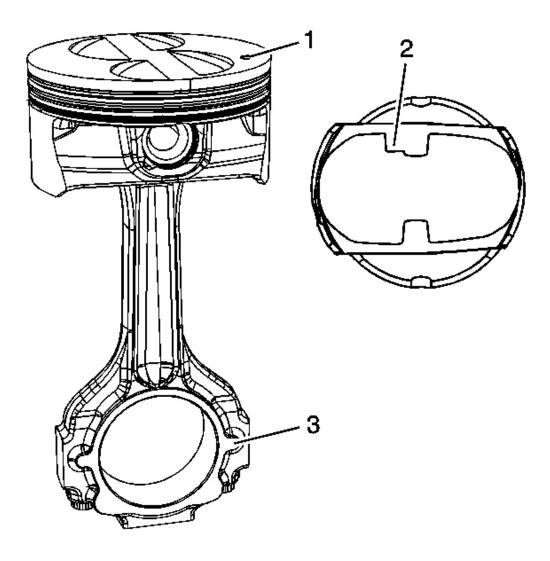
Locating Piston Lug & Tab Courtesy of GENERAL MOTORS CORP.
